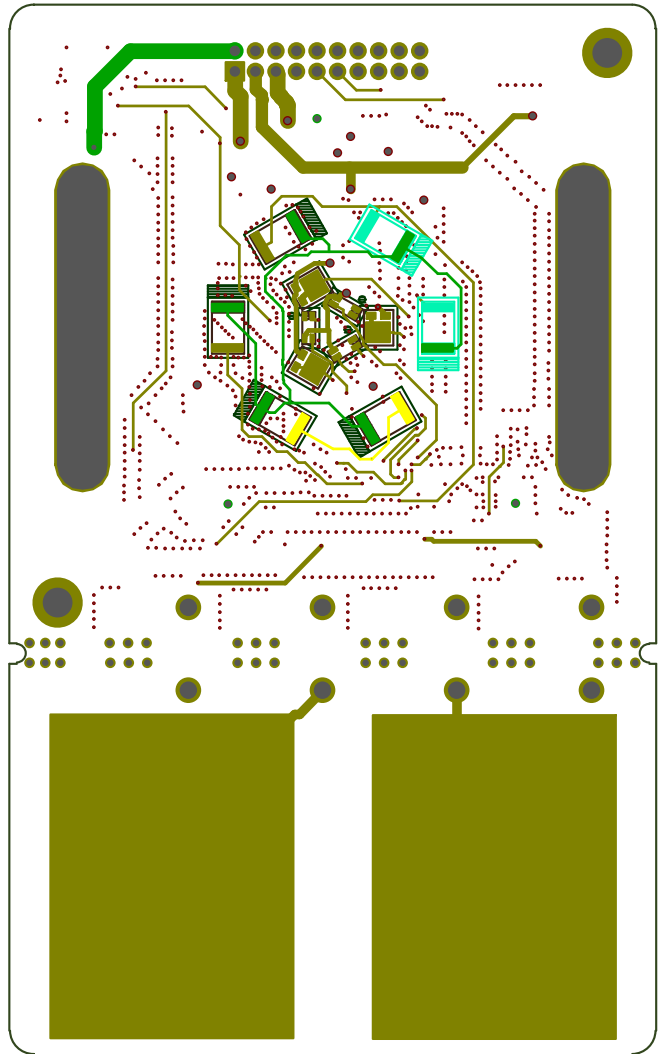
EVAL-ADPD7000Z PCB Layout: Bottom
